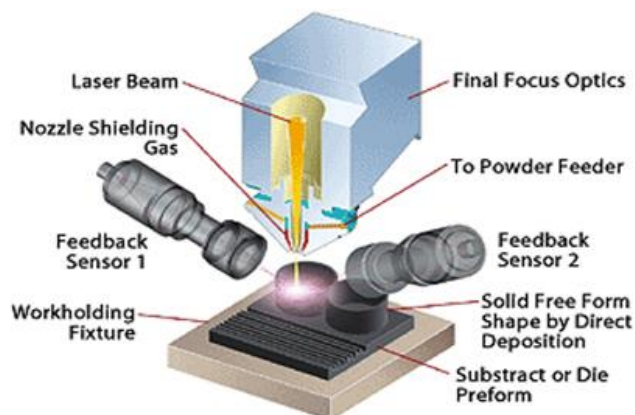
A typical Direct Metal Deposition system showing a component being built layer by layer [11]
